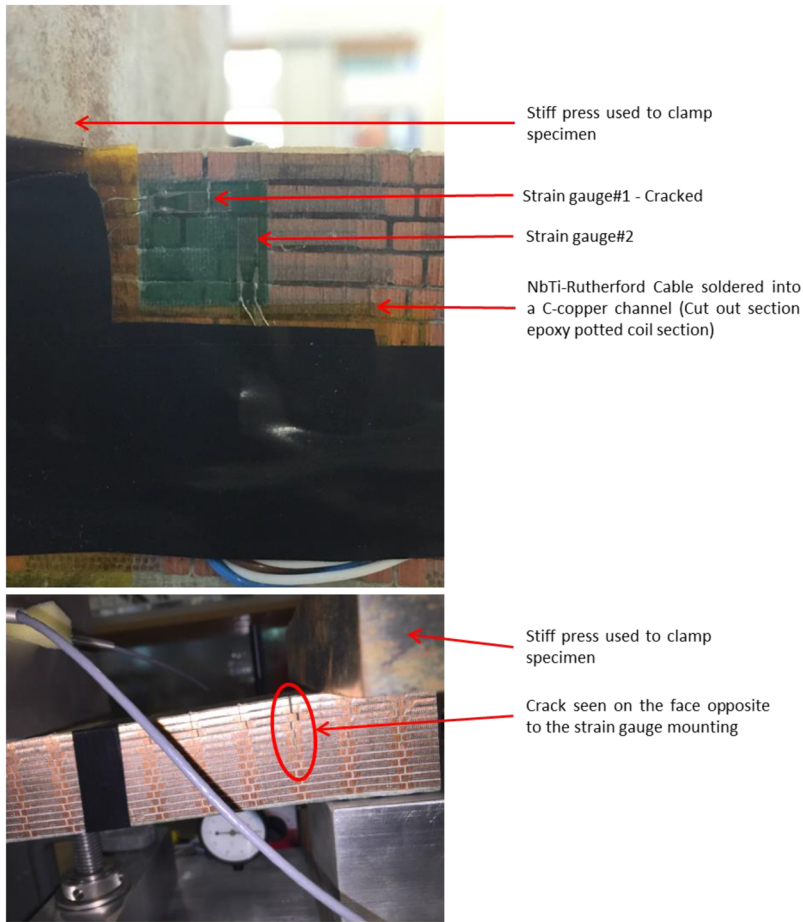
Cracking and crack propagation on the coil section specimen during the cantilever test.
